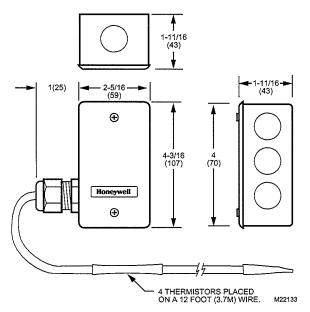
C7021J, C7023J, C7031J, C7041J dimensions in in. (mm).
